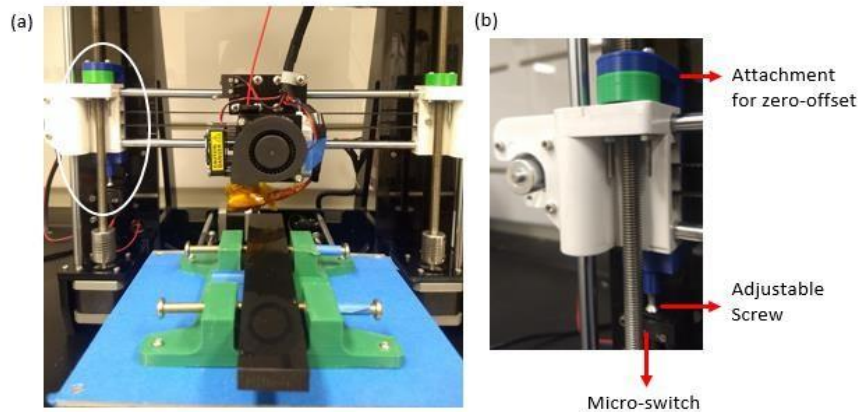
a) Jig attached to the print bed to secure ABS bars b) Attachment to adjust the z-axis of the machine.
